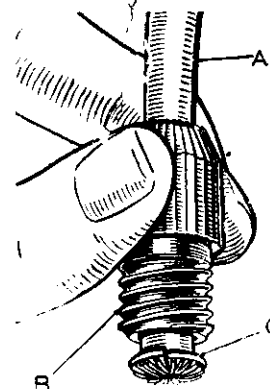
METHOD OF FITTING CABLE TERMINALS
